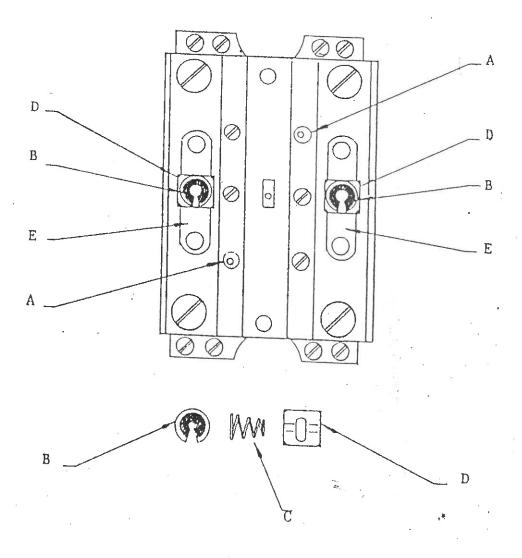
Contactor CR-1 Contact Cleaning and Replacement
